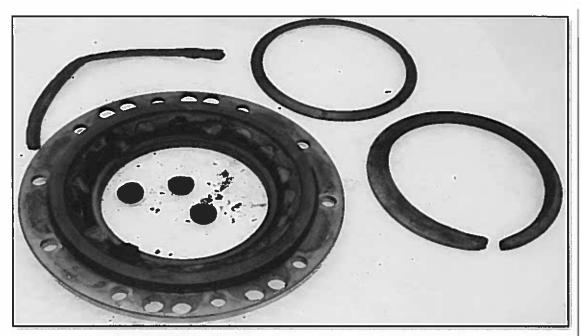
Damaged HP Compressor Location Bearing, cage, and race.
